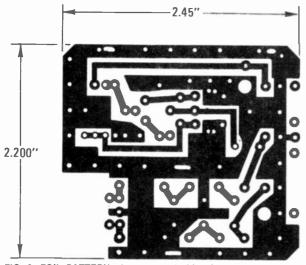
FOIL PATTERN of component side of double-sided main board shown actual size.
